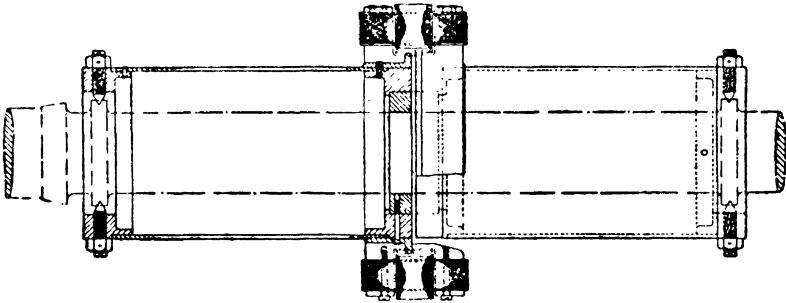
Showing method of fitting Moullin torsionmeter to shaft.
